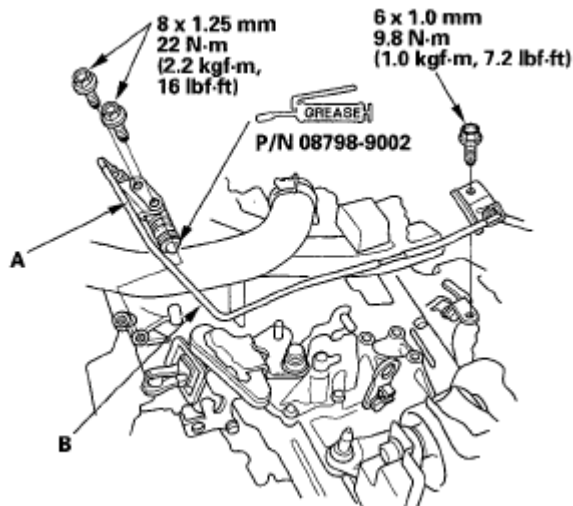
Identifying Slave Cylinder And Clutch Line With Torque Specifications
